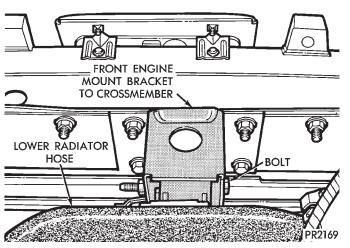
Remove or Install Engine Mount Bracket from Front Crossmember
